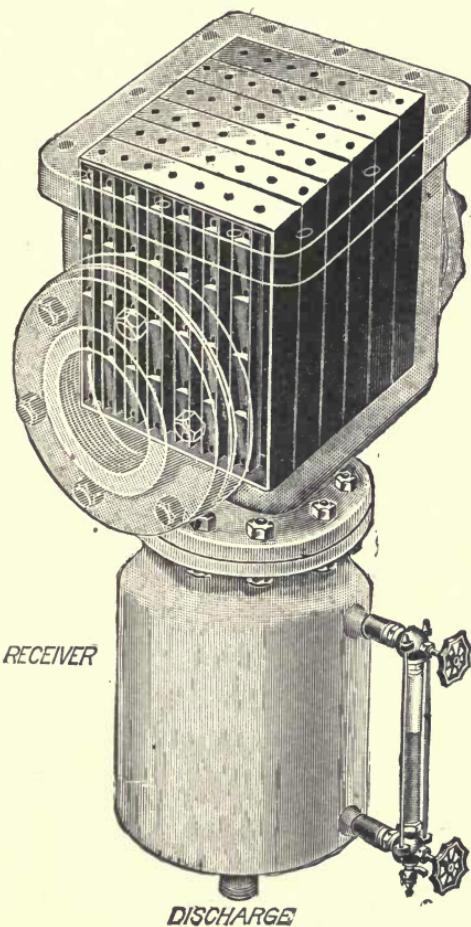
Oil Separator Consisting of Vertical Plates with Openings Giving Steam a Zigzag Course.
